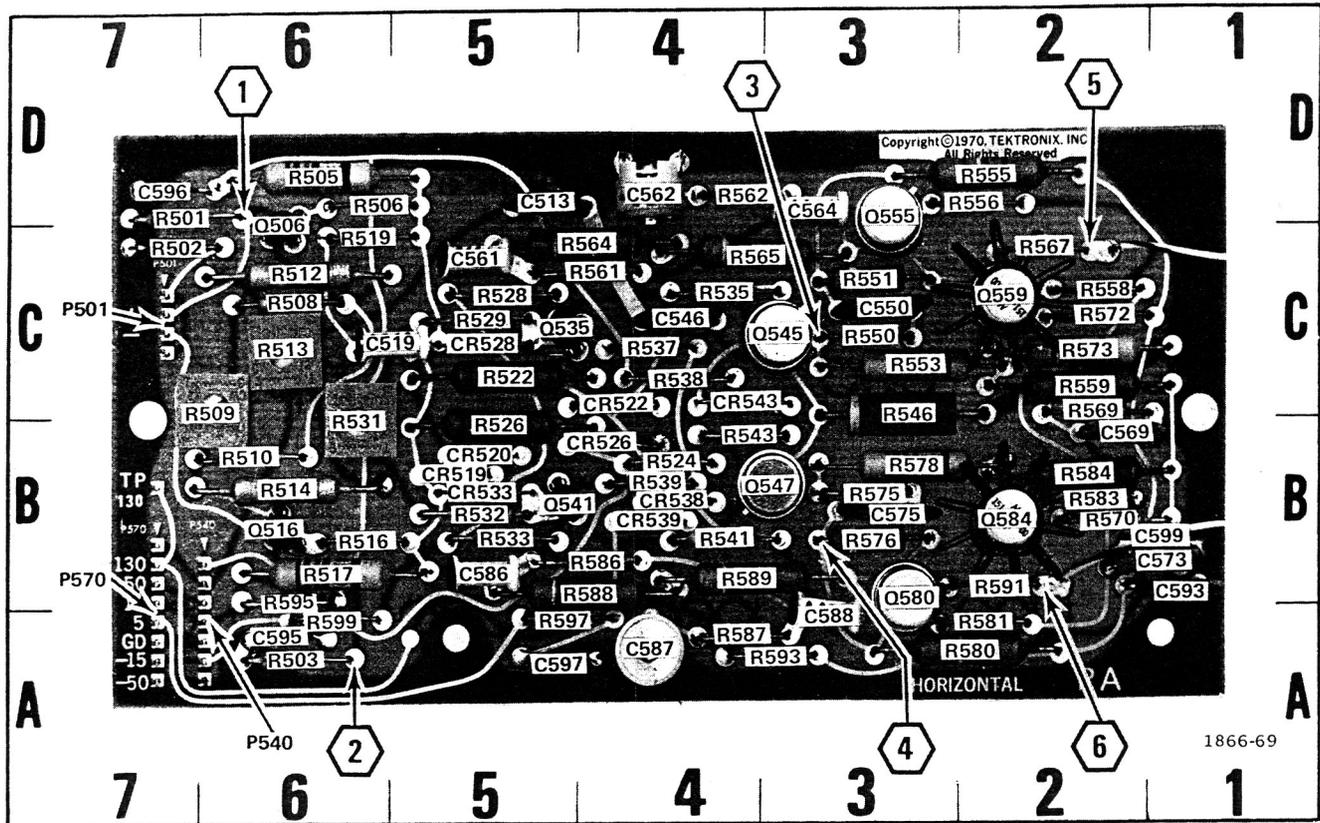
A6-Horizontal Amplifier circuit board assembly.
